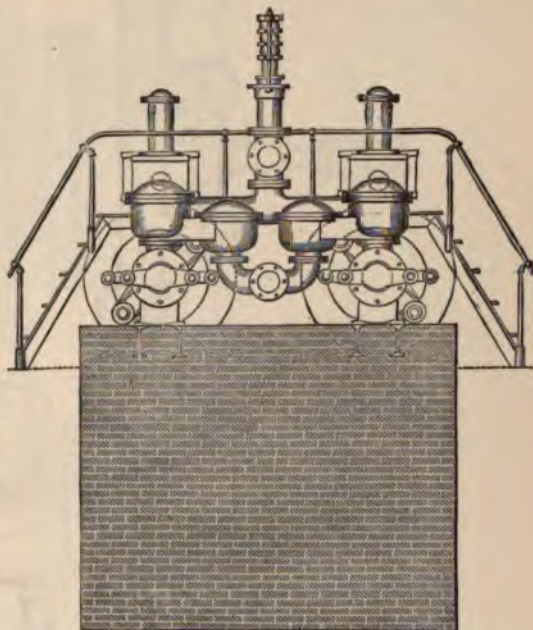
Worthington Compound Condensing High-Pressure Pumping Steam Engine: End View.
